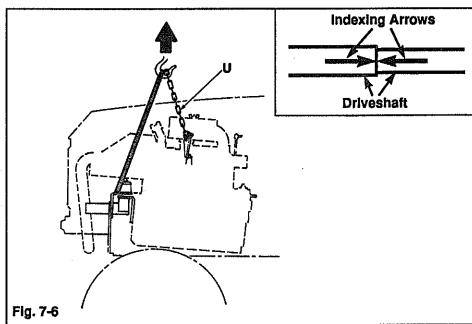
, and lift slightly on the front of the engine until the holes align and the four 3/8" capscrews can be installed between the frame rails and the front engine mount plate.
